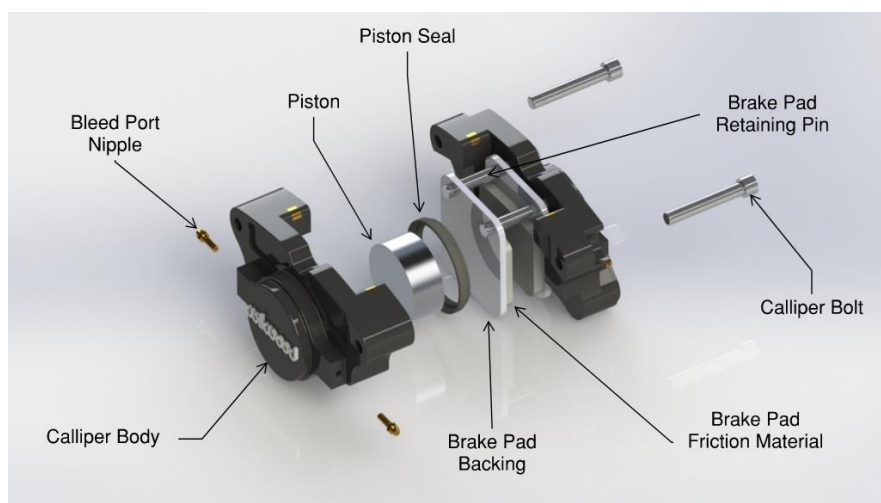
Exploded view of Wilwood GP200 calliper by Coloma C. L. [3] with key components indicated.
